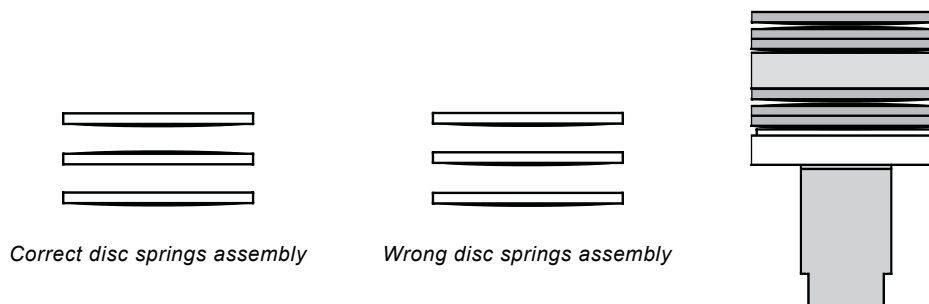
Assembling the disc spring stacks onto the coupling unit
